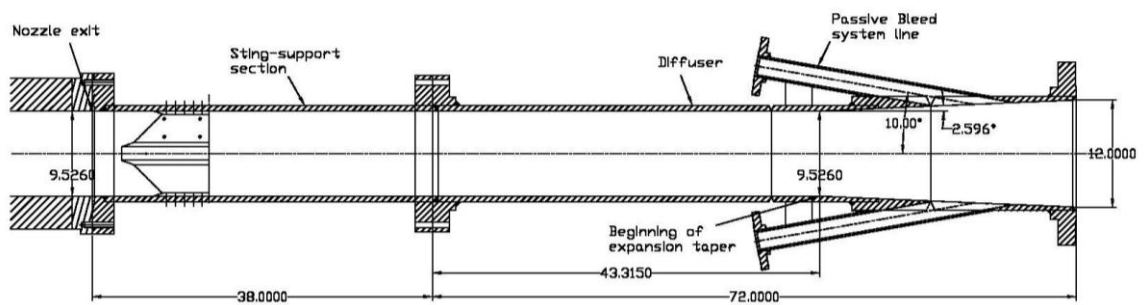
Schematic of original sting-support and diffuser sections with test section. Dimensions in inches.
